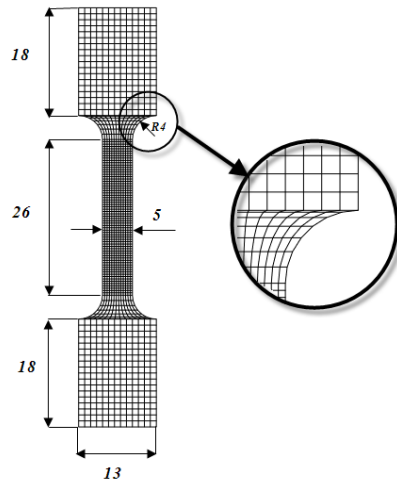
Geometrical models of FEM uniaxial superplastic tensile test (Dimensions in mm).
